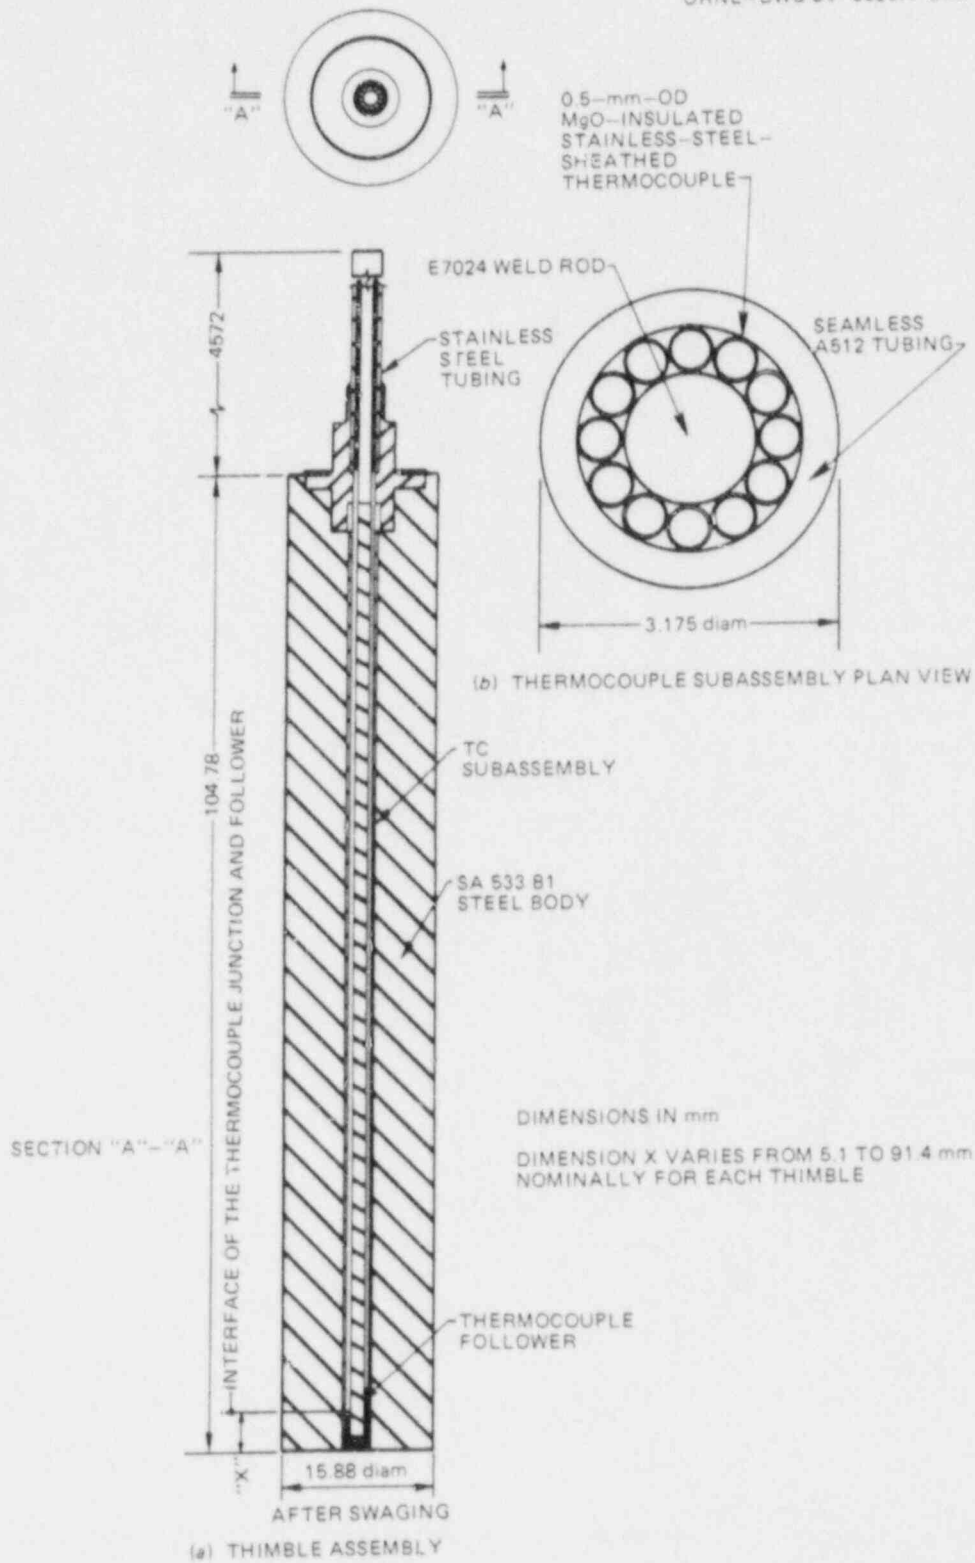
Details of PTSE-2 thermocouple thimble assembly.
